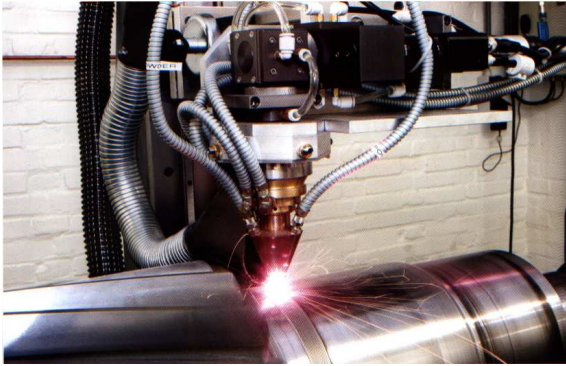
Laser clad repair of worn sealing ring, photo courtesy of Stork Gears & Services.
